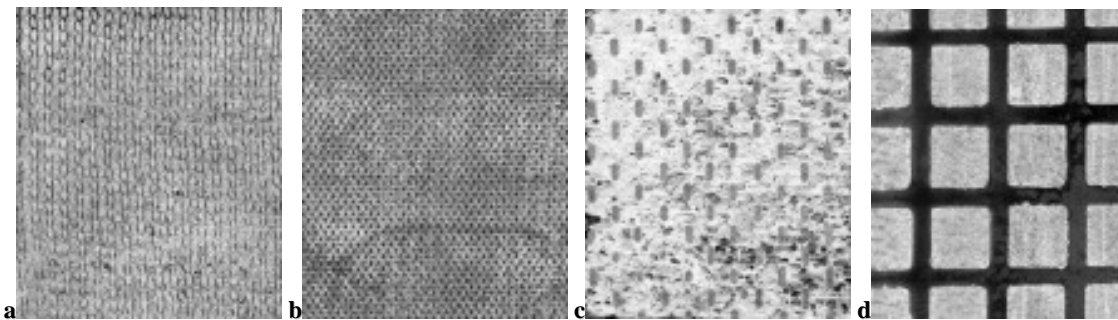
Aluminium foam panel reinforced in the surface with stainless steel a -net, b - expanded metal sheet, c - woven steel wire, d – perforated sheet.
